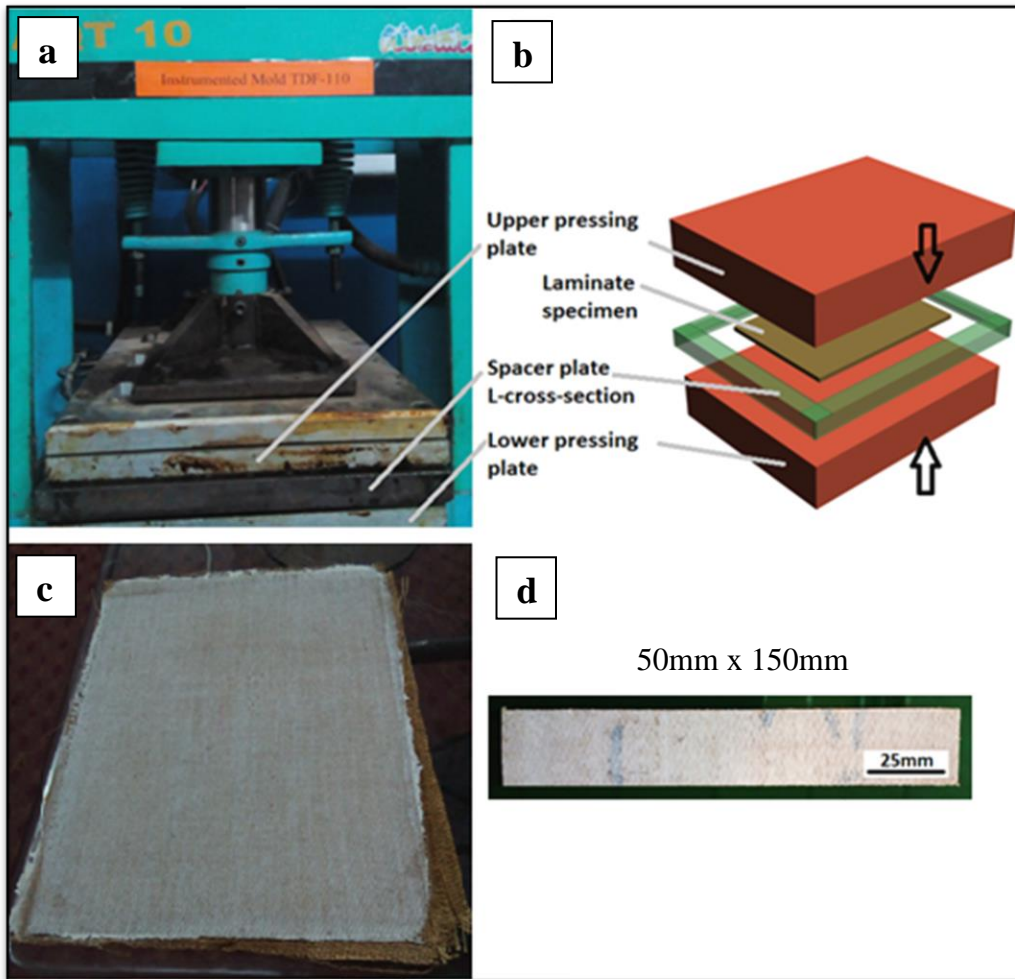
(a) Compression molding machine used for thermoforming of composite samples, (b) schematic of compression molding, (c) fabricated composite specimen (non-commingled of jute/PP), (d) actual specimen ready for testing
